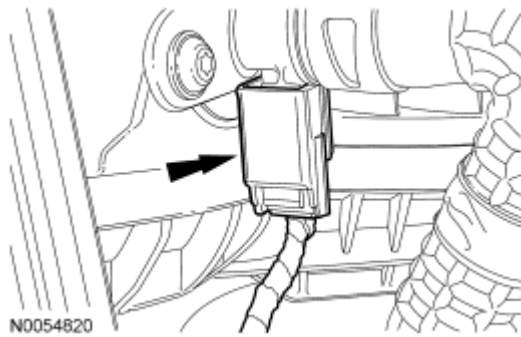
Identifying Positive Crankcase Ventilation (PCV) Fitting Electrical Connector
